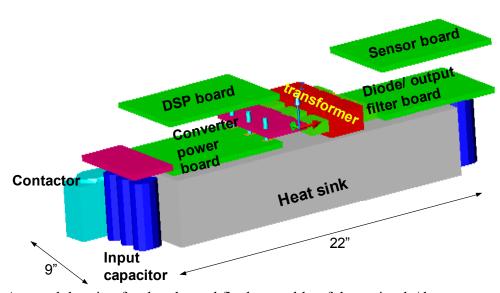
Autocad drawing for the planned final assembly of the entire dc/dc converter.
